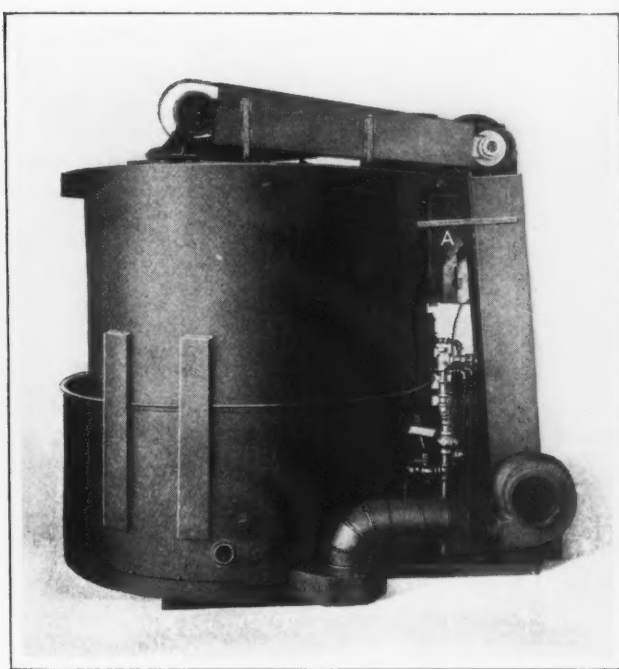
Side View of Arc-welded Machine Illustrated in Fig. 1
